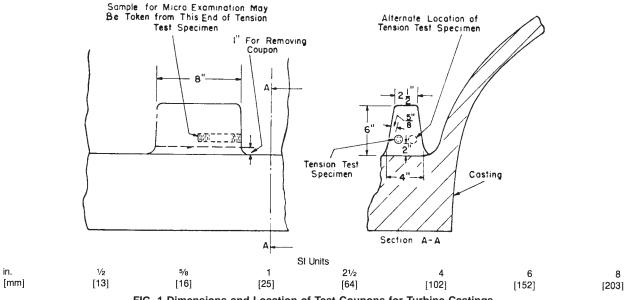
Dimensions and Location of Test Coupons for Turbine Castings
